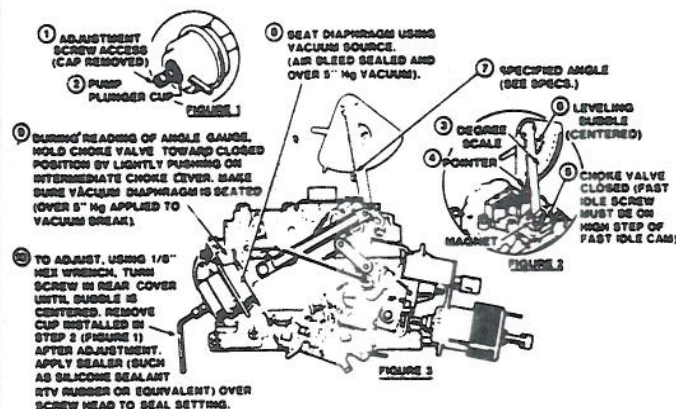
Secondary vacuum break adjustment. 1982 E2SE carburetor
